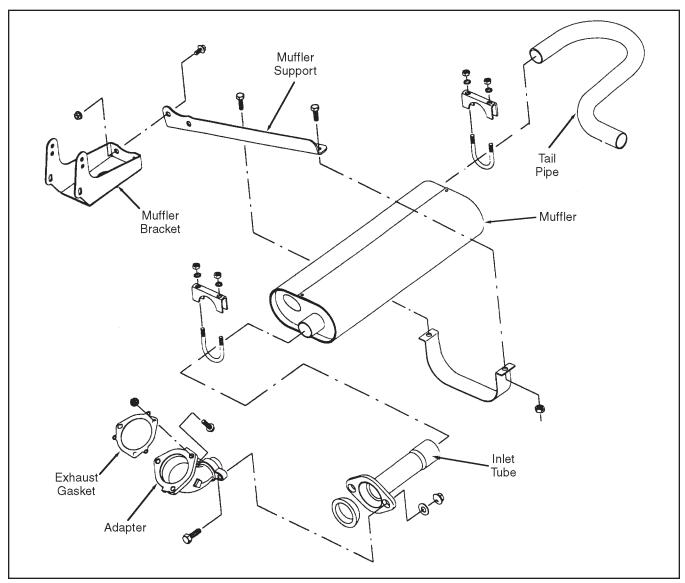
E-6. Muffler and Exhaust System — 3-Cylinder Engine (Suzuki 660)
